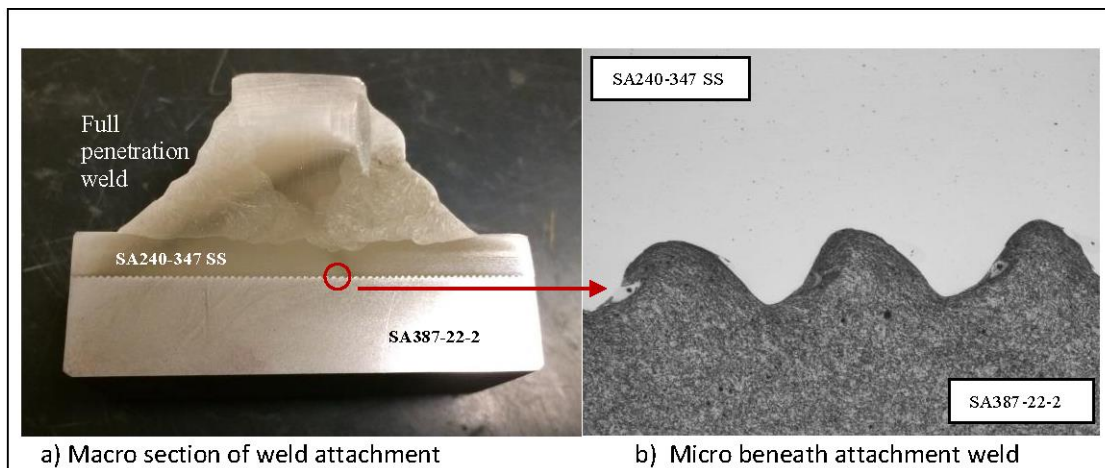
Macro and Micro Examination of Weld Attachment on EXW Clad
